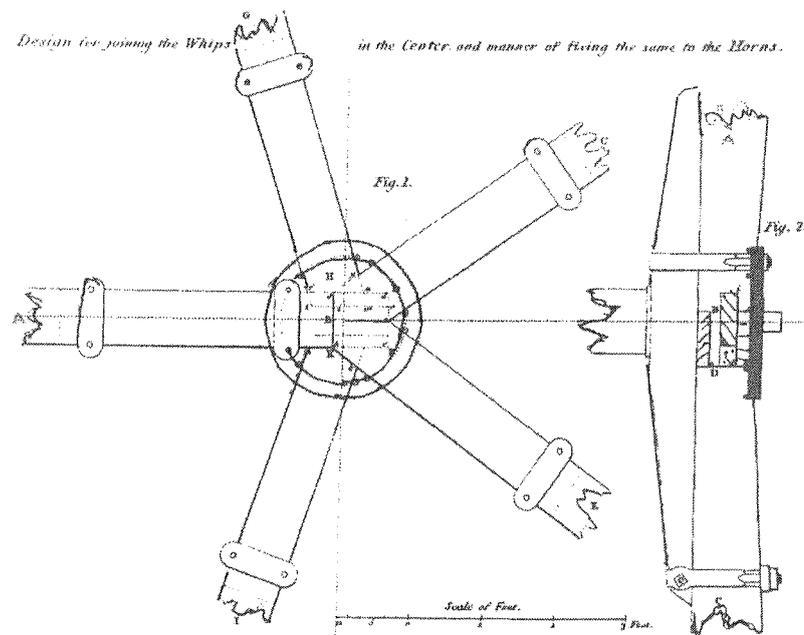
A very careful designer, John Smeaton provided detailed drawings of the method to be used to join five sails in such a way that any one could be removed without affecting the others. Reproduced from the Royal Society.
